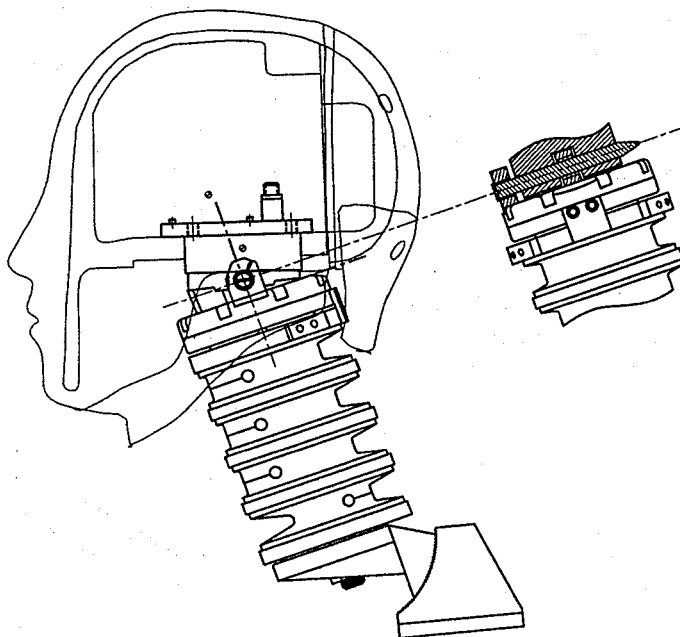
Assembly drawing of the modified neck showing the initial position adjustment clamp and the torsion element on top of the neck.
